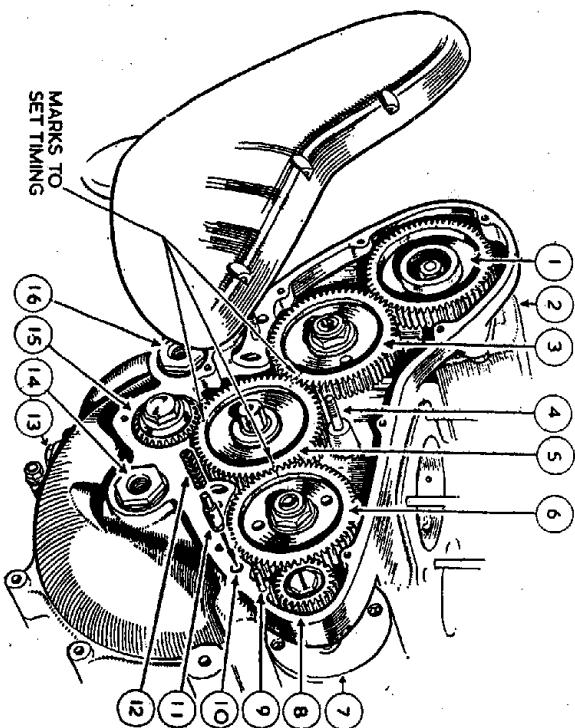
TIMING GEARS, SHOWING THE TIMING MARKS.
